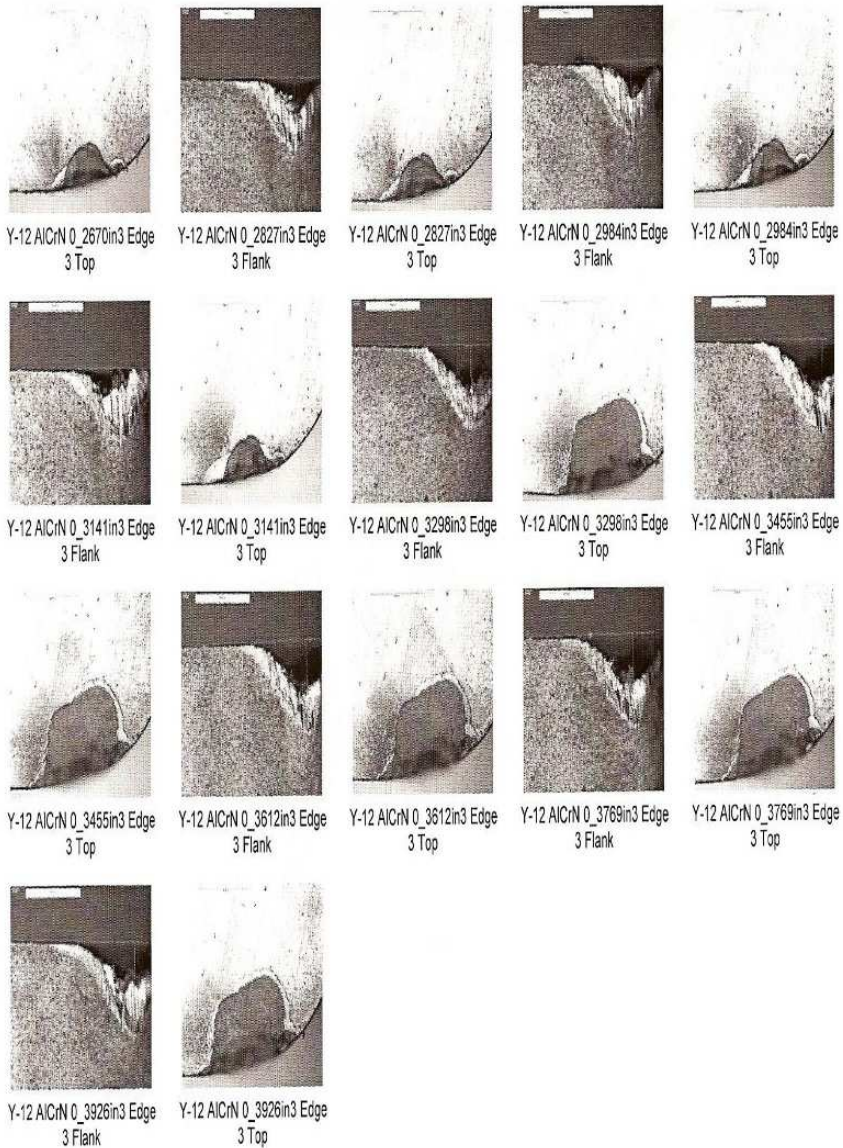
AlCrN Tool Cutting Edge 3 machined at 200 RPM. 0.2670 - 0.3926 in³ workpiece removed
